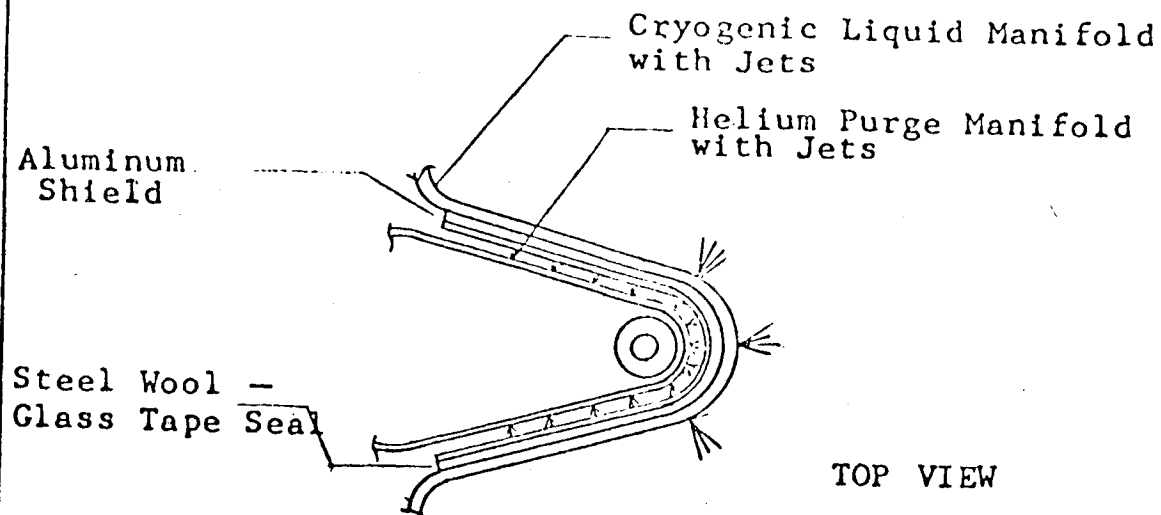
Jet System No. 4 for Front Side Chilling of Weldments using a Cryogenic Liquid — Traveling Shield with Helium Purge Manifold
